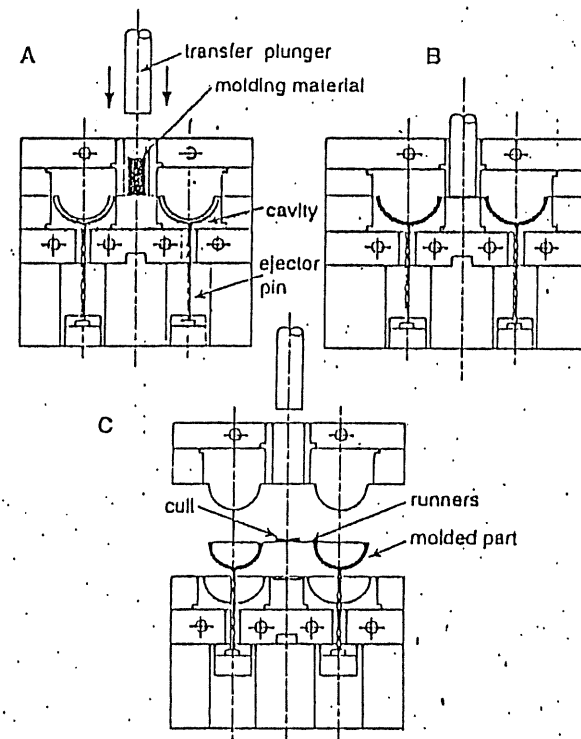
Transfer-molding operation. A. Transfer pot is loaded while mold is in closed position. B. Plunger pushes molding material into mold form. C. Mold opens and ejector pins push out molded part. (Adapted from J. L. Hull, in the *Concise Encyclopedia of Polymer Science and Engineering*, J. I. Kroschwitz, ed. Copyright © 1990 by John Wiley & Sons. Reprinted by permission of John Wiley & Sons, Inc.)
